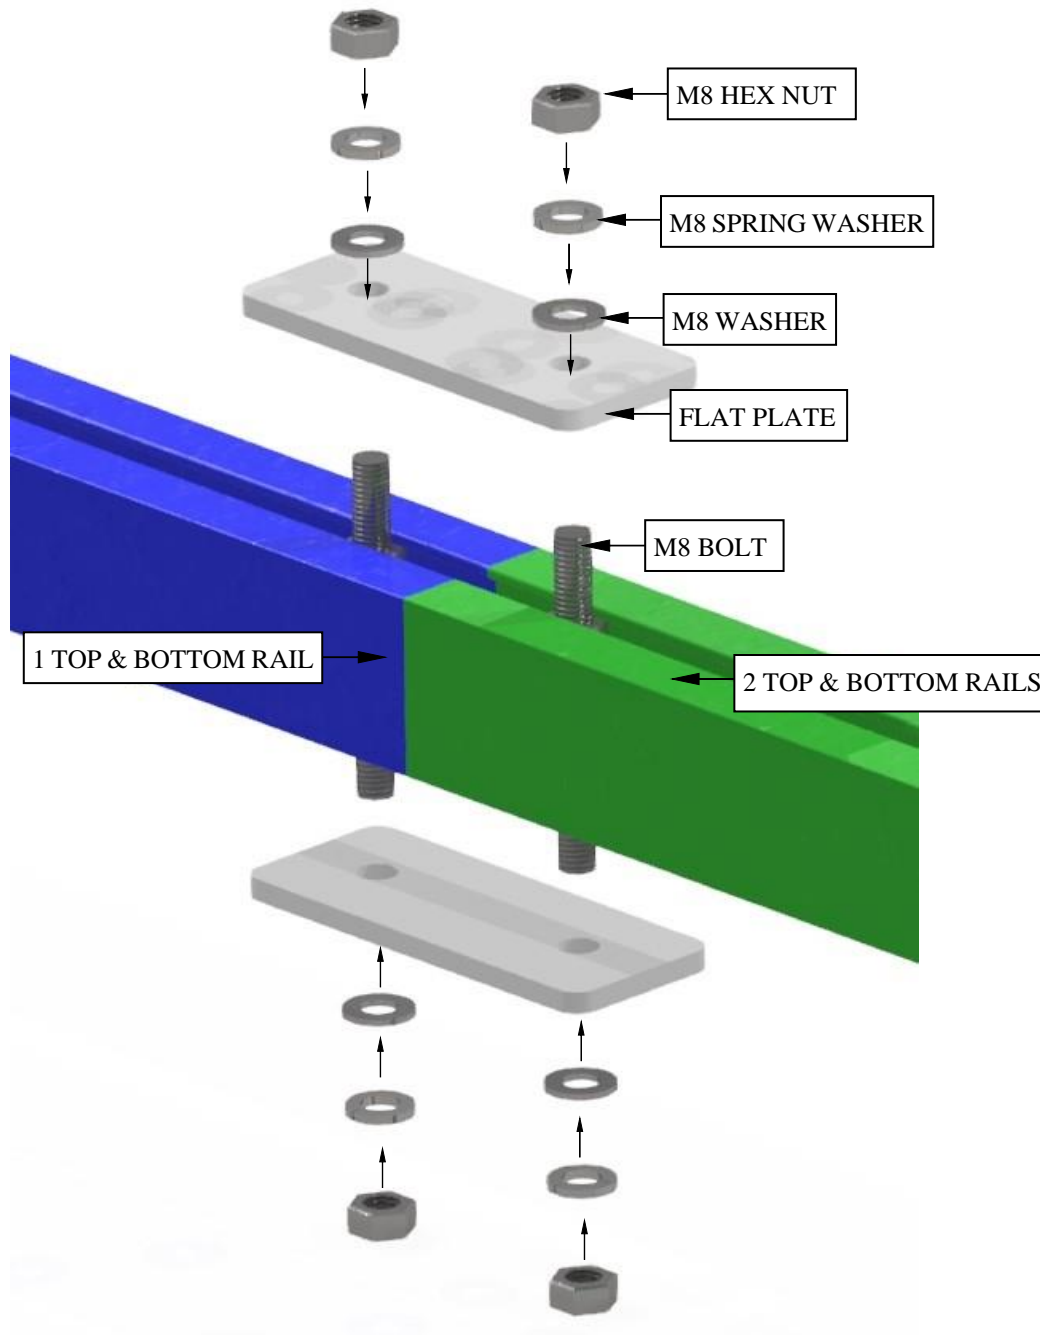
Flat Plate to Top & Bottom Rail Fixing
